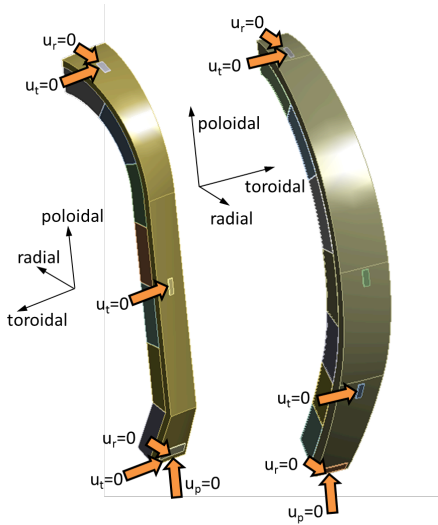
Mechanical boundary conditions posed by the attachment system on inboard (left) and outboard (right) segment
